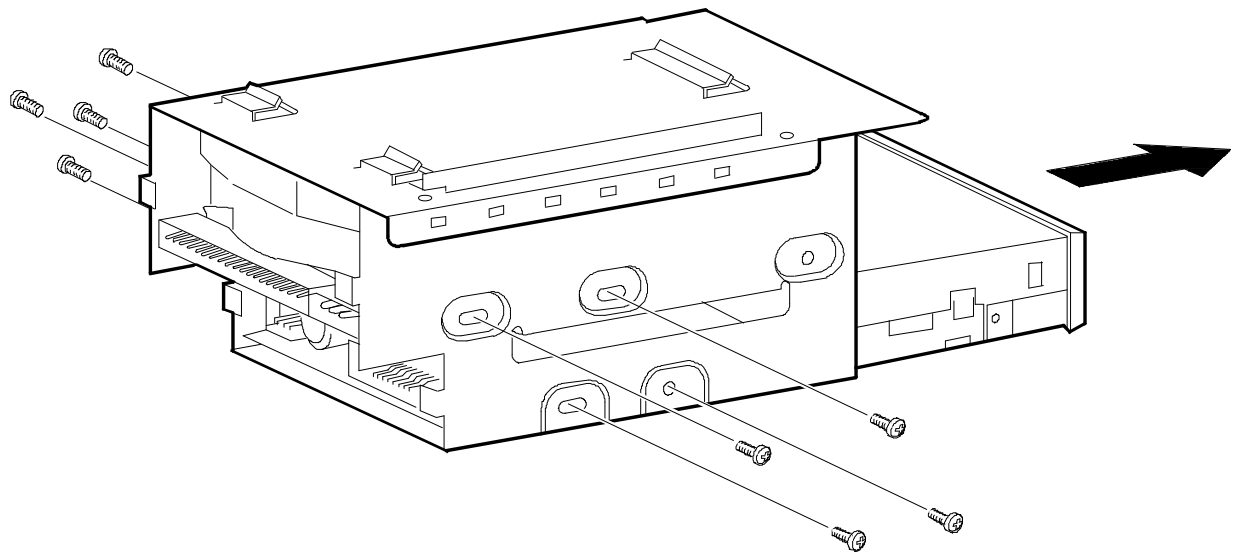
9 Removing the Lower Drive Bay Assembly
